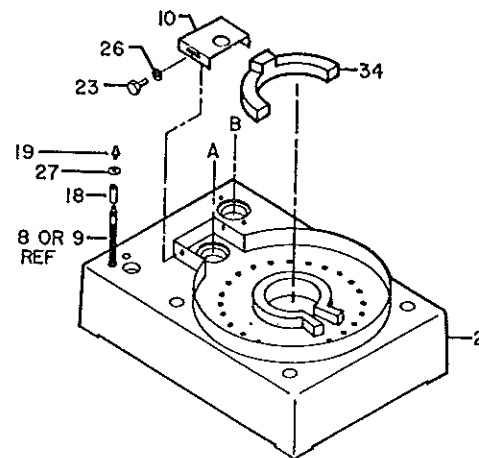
WELDMENT PART NUMBER LOCATION
